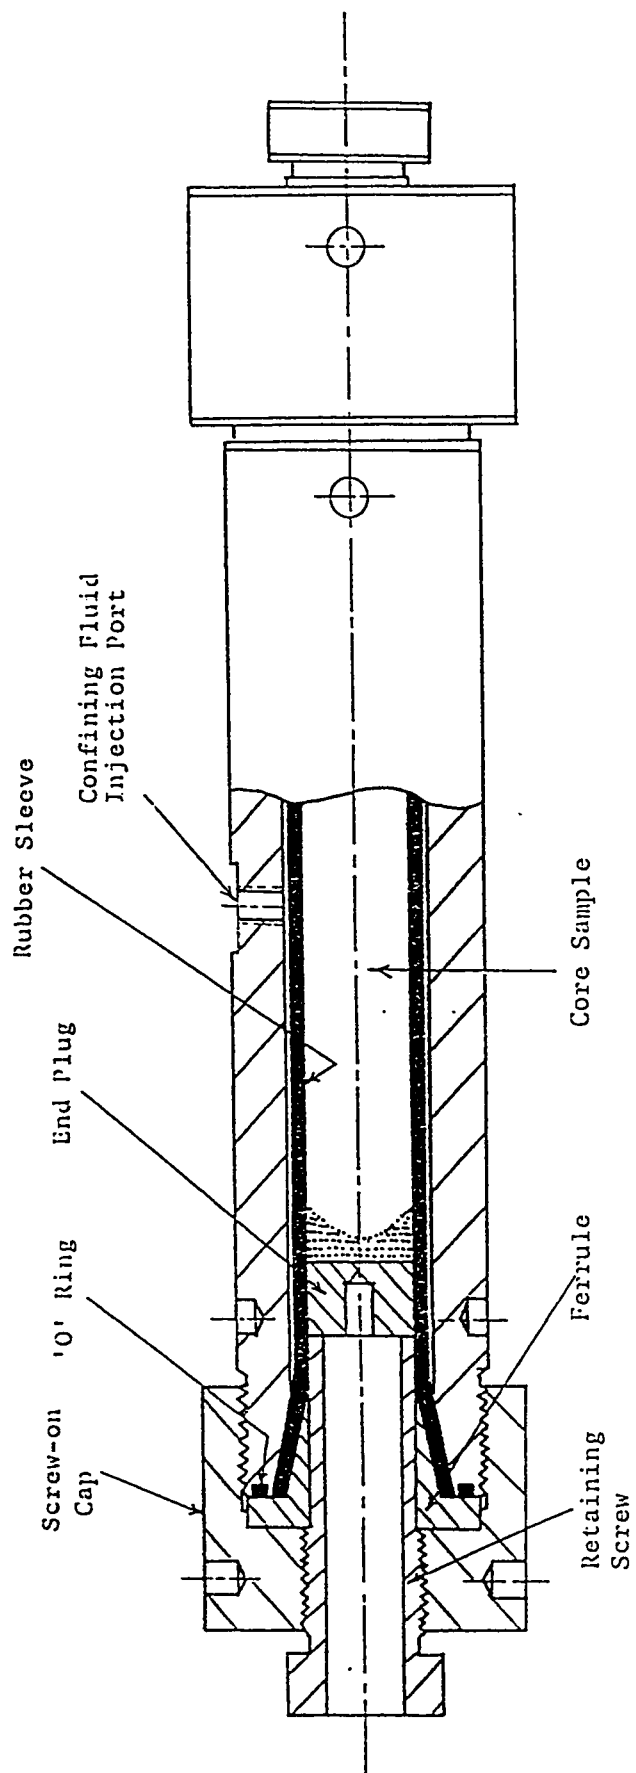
Cross-Sectional View of Assembled Core Holder.
